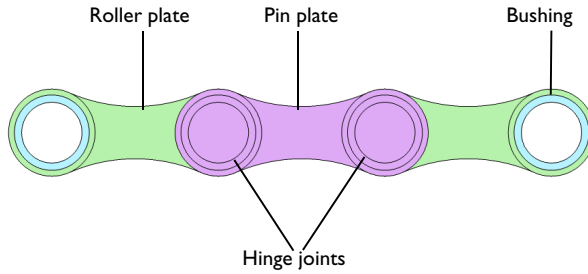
Enlarged view of a chain link. A chain is formed by assembling roller plates and pin plates alternately.
